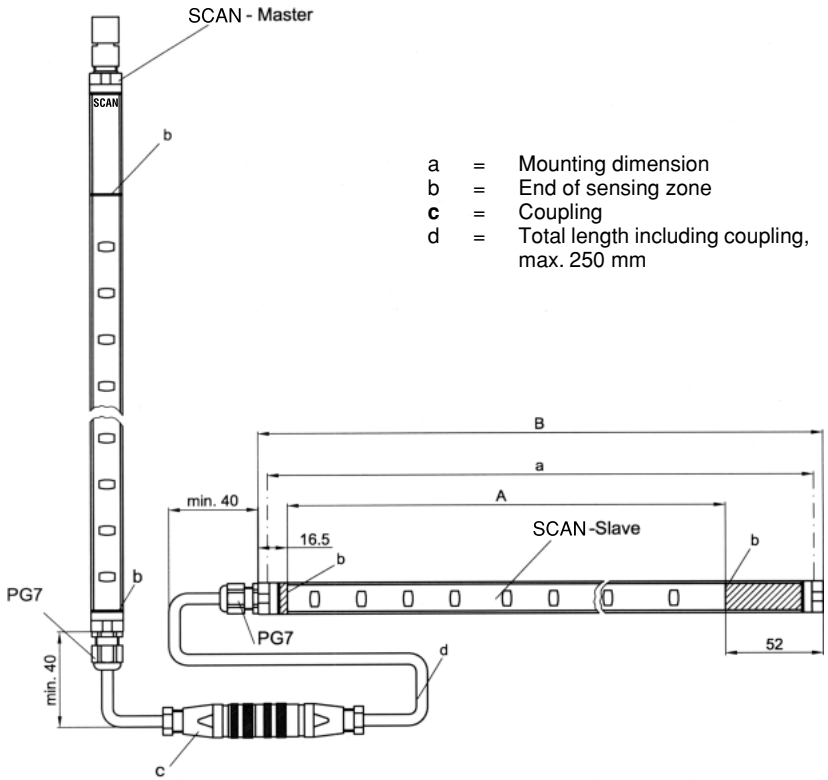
Dimensional Drawing of SCAN "Cascaded Design"
